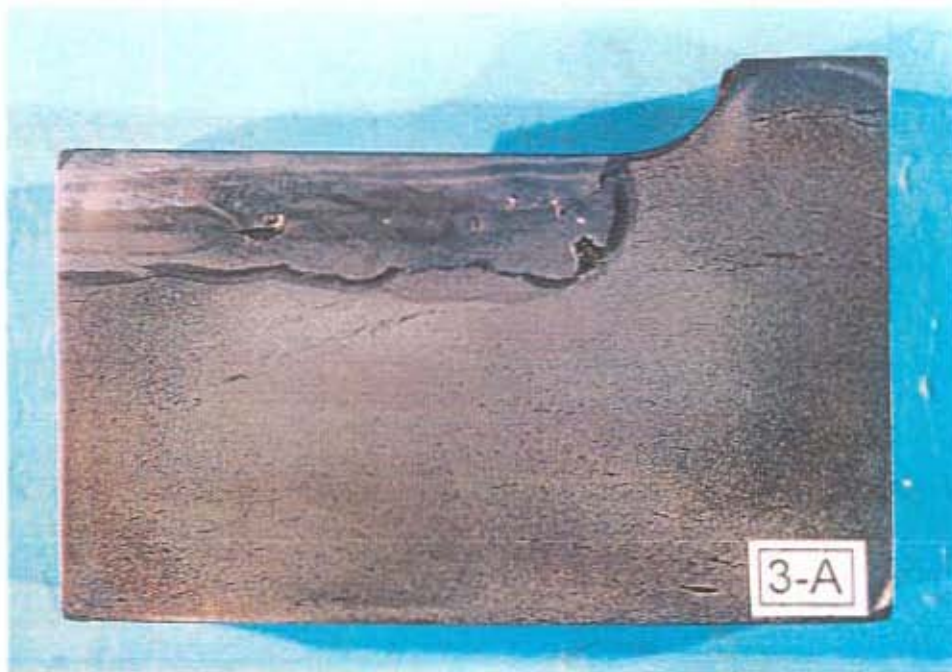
Etched Cross-Sections of the Oilway Repair Weld at Keyway 2A and 3A Showing Multiple Weld Defects.
